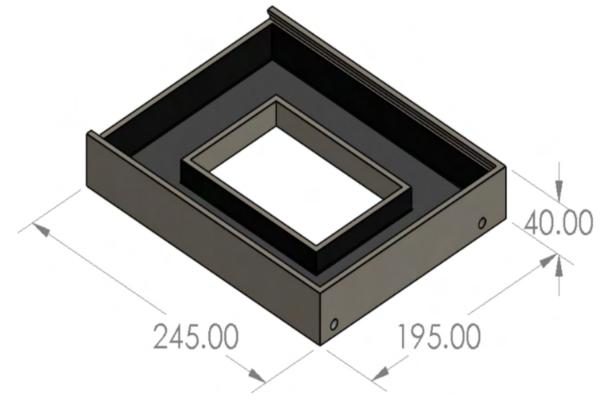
3D Printed Box with insulation coating drawing with dimensions in millimeters.
